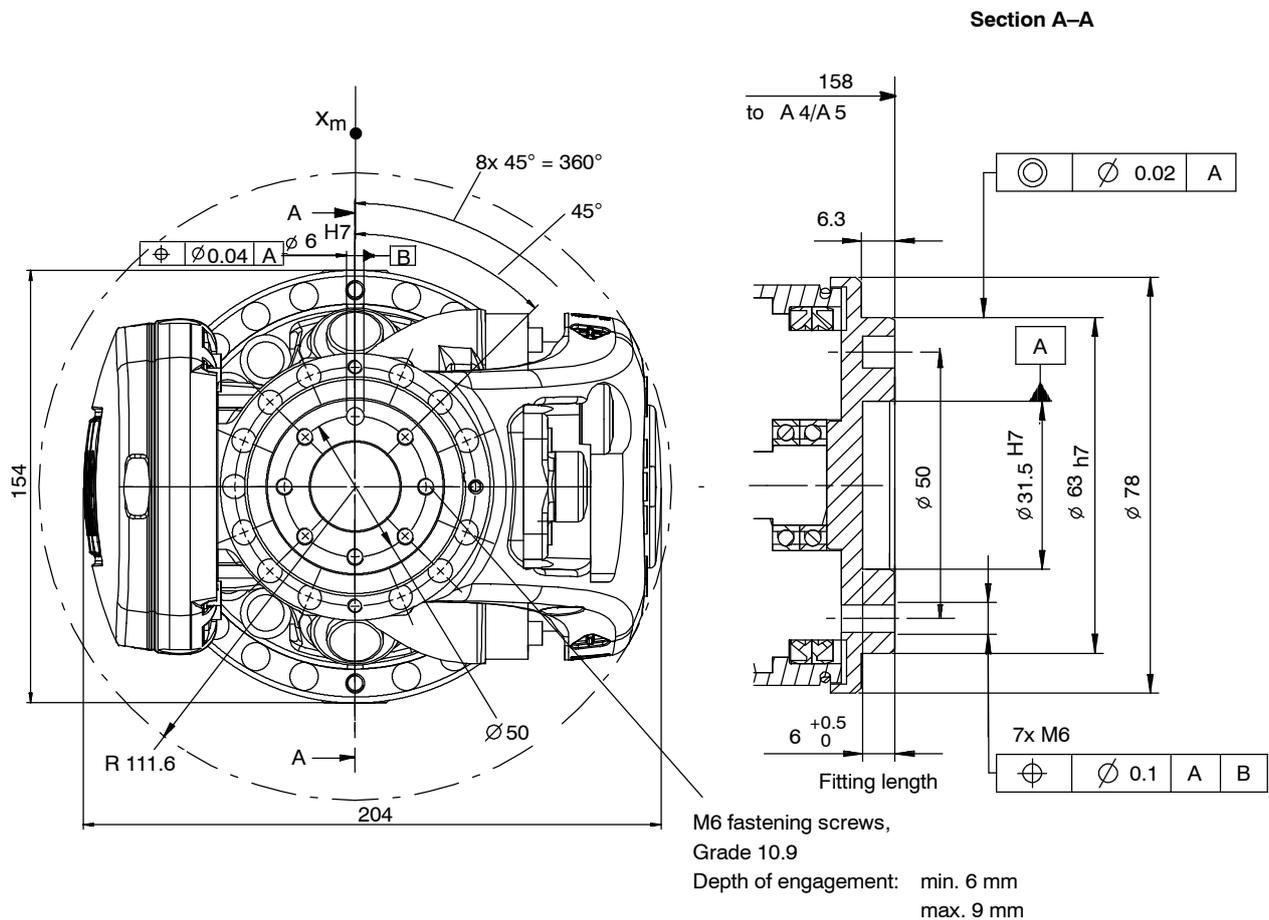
DIN/ISO mounting flange for in-line wrist 16 kg
